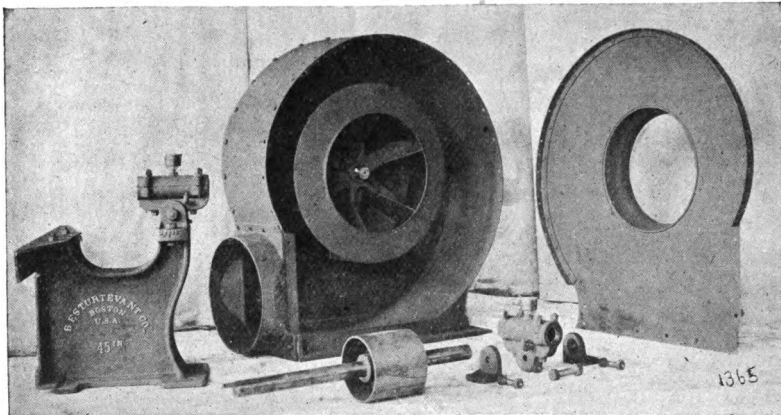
DETAILS OF STEEL PLATE FAN.
